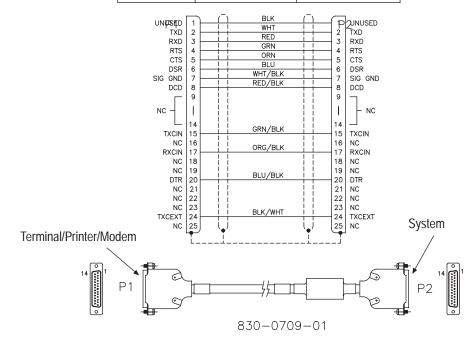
Man-Machine Interface Port Cable (P/N 830-0708-01)
